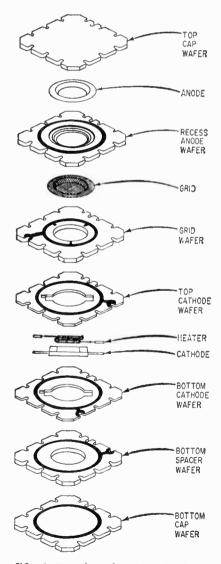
Printed wafer tube developed at the National Bureau of Standards. This view is of an unassembled single-sided triode that uses printed conductors
